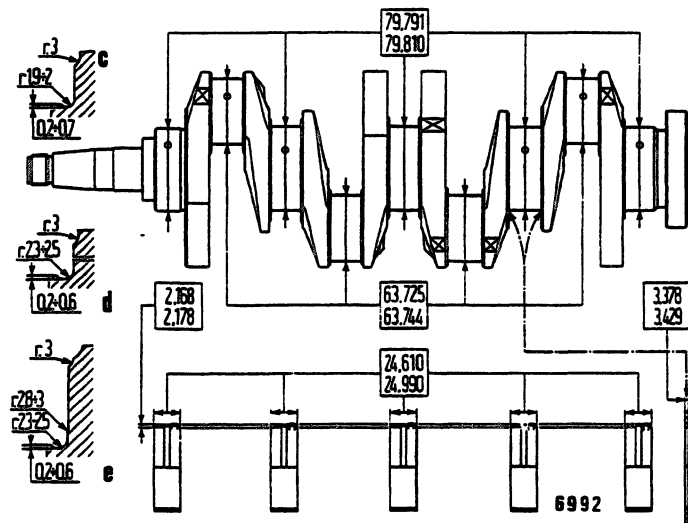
Crankshaft journal, bearing and thrust washer dimensions.
